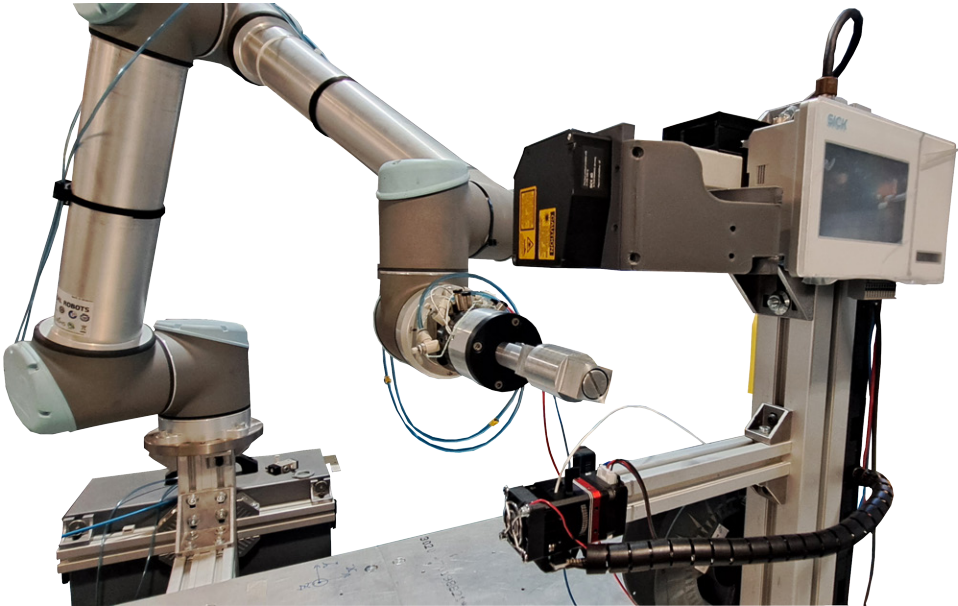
Detail of the build platform approaching the calibration and extrusion fixture.
